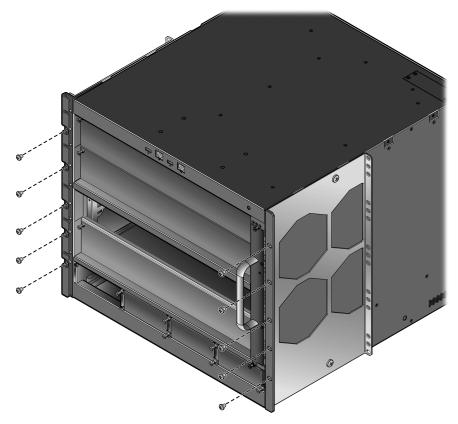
Attaching the Mid-Mount Brackets to the Front of the Chassis
